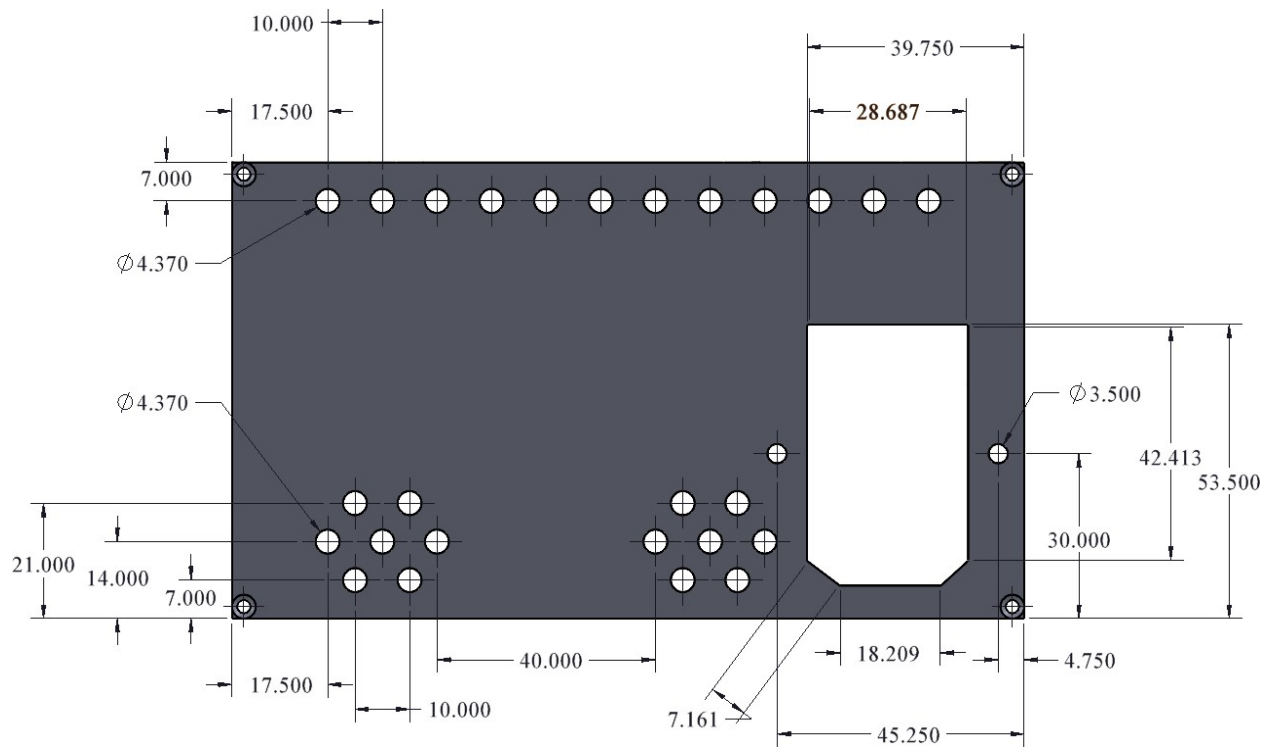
Side panel with plug slot. All holes are equidistant. Plug slot is symmetrical.
